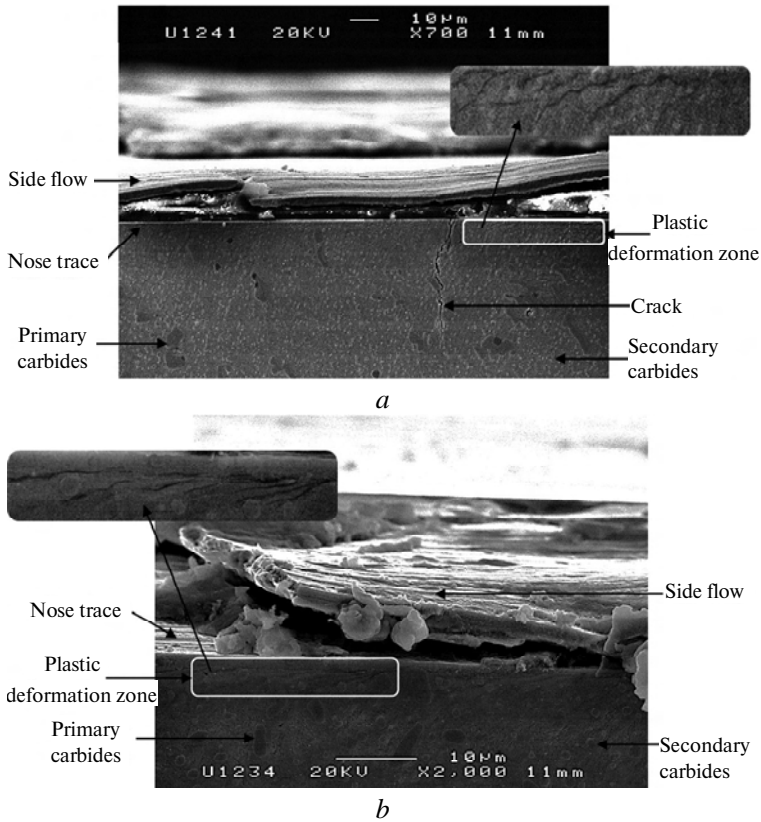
Conditions of material surface after machining at feed value  $f_2 = 0.2$  mm/rev with uncoated CBN 7025 wedge (a) and TiAlN-coated CBN 8120 wedge (b).
